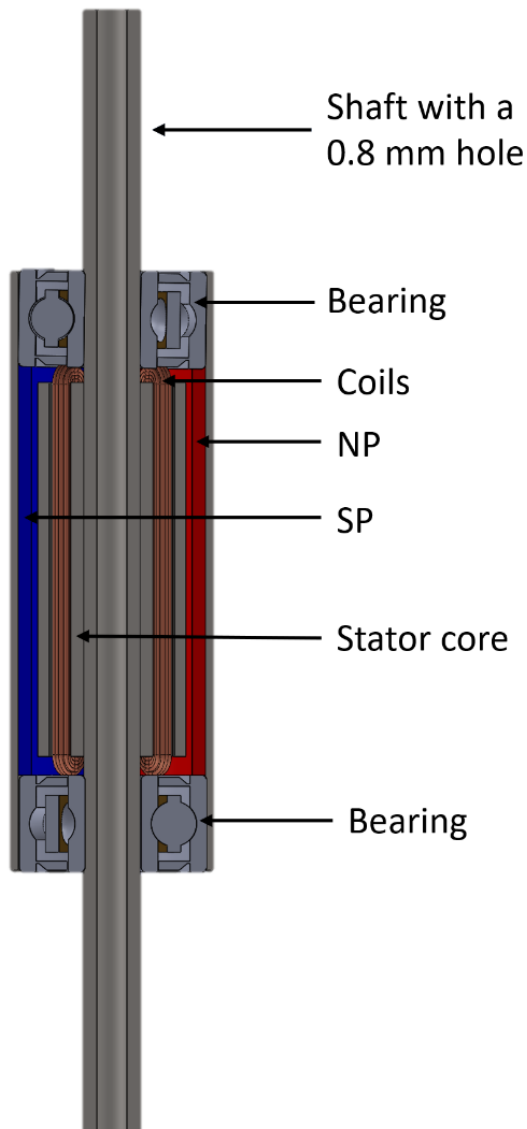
Cross-sectional view of the actuator showing the components with two bearings added to seal the top and bottom of the actuator.
